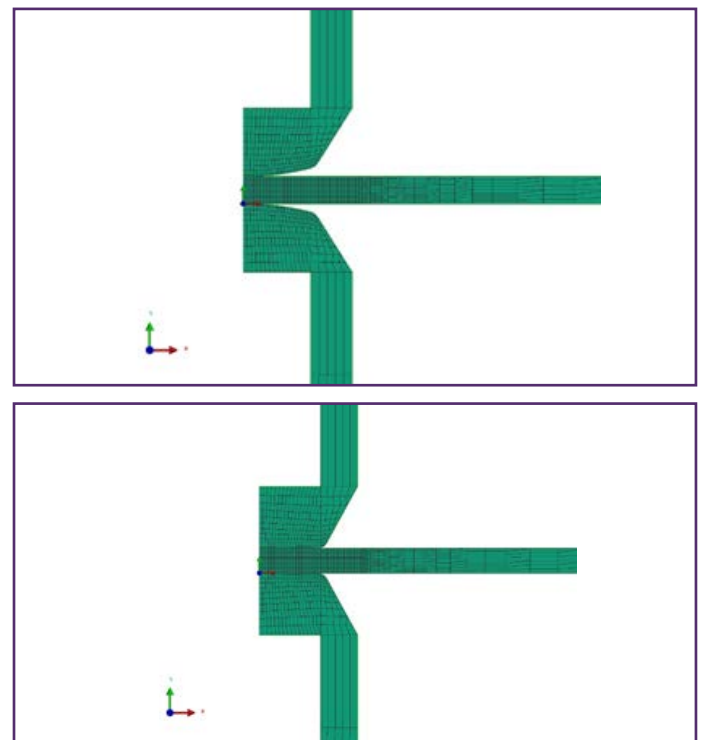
Computational model of the spot resistance welded joints of two sheets
